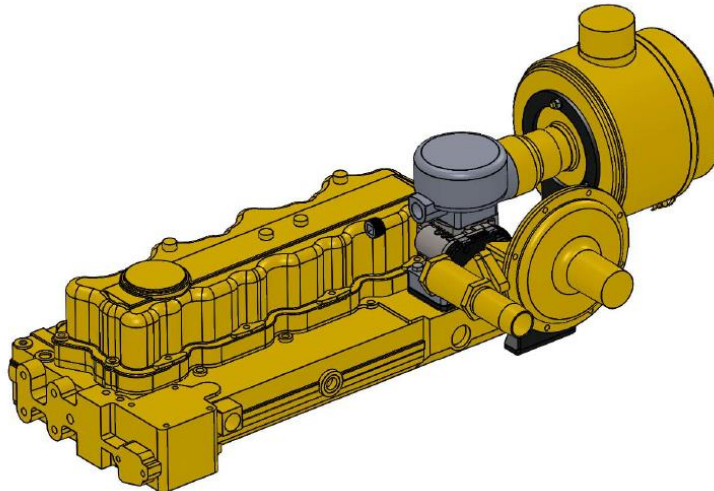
Remove Mixer Plug and Install Piping Between Regulator and Mixer
